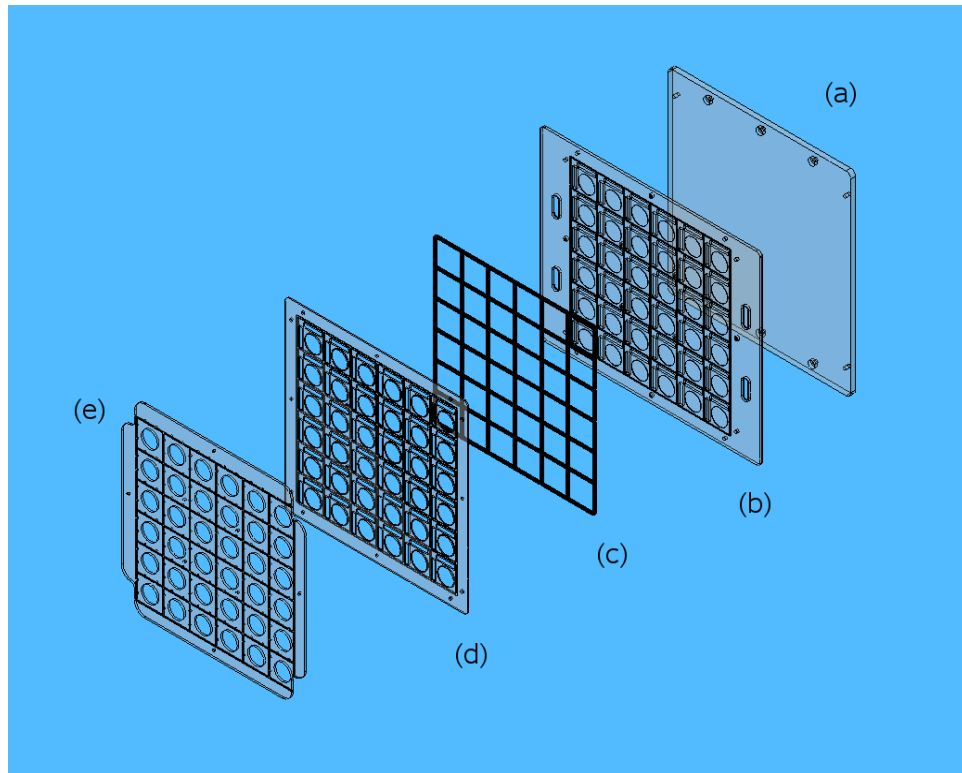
Schematic showing an exploded view of the Petri dish cassette. (a) Levelling plate (b) Bottom holder plate (c) Divider Plate (d) Top holder plate (e) Light holder plate.
